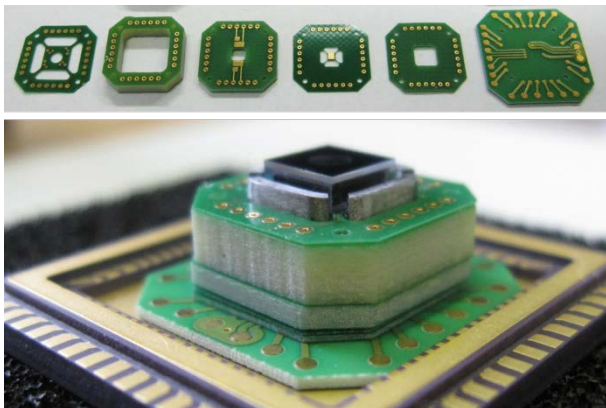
(top) Individual PCB layers to be stacked; (bottom) Partially assembled MAC physics package with the vapor cell on the top.
